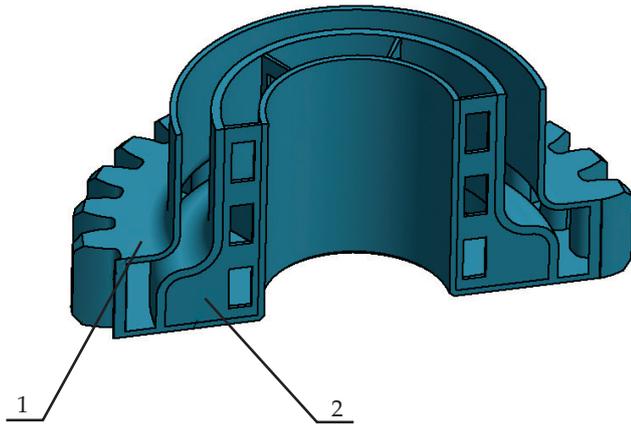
Gear clutch: 1 – thin-walled coating, 2 – rib
